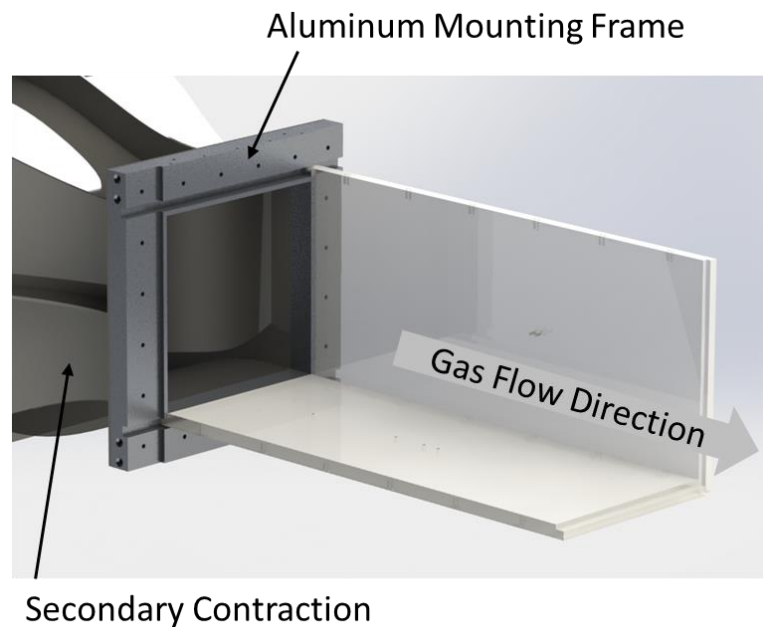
CAD rendering of the test section mounting frame on the contraction outlet, along with the back and bottom test section walls.
